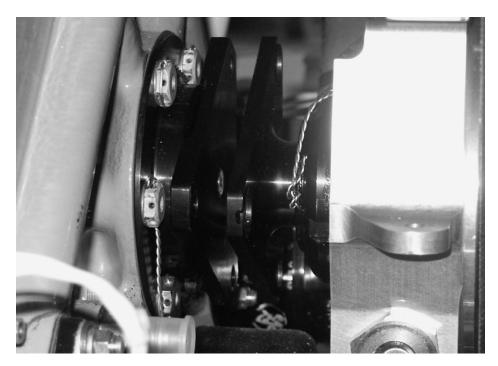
Flange Position for Lateral and Axial Alignment Check
